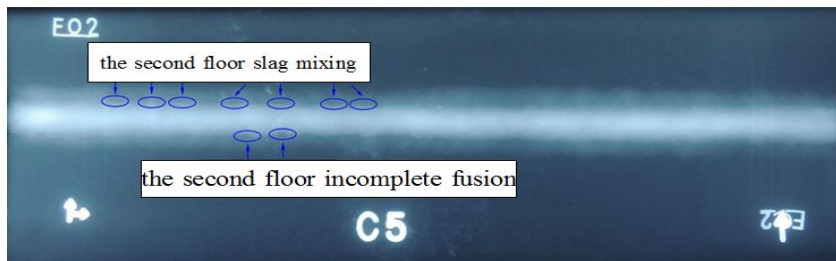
X-ray radiographic test film of shielding gas CO<sub>2</sub> 20% + Ar 80% welding specimen by opening angle 40°
